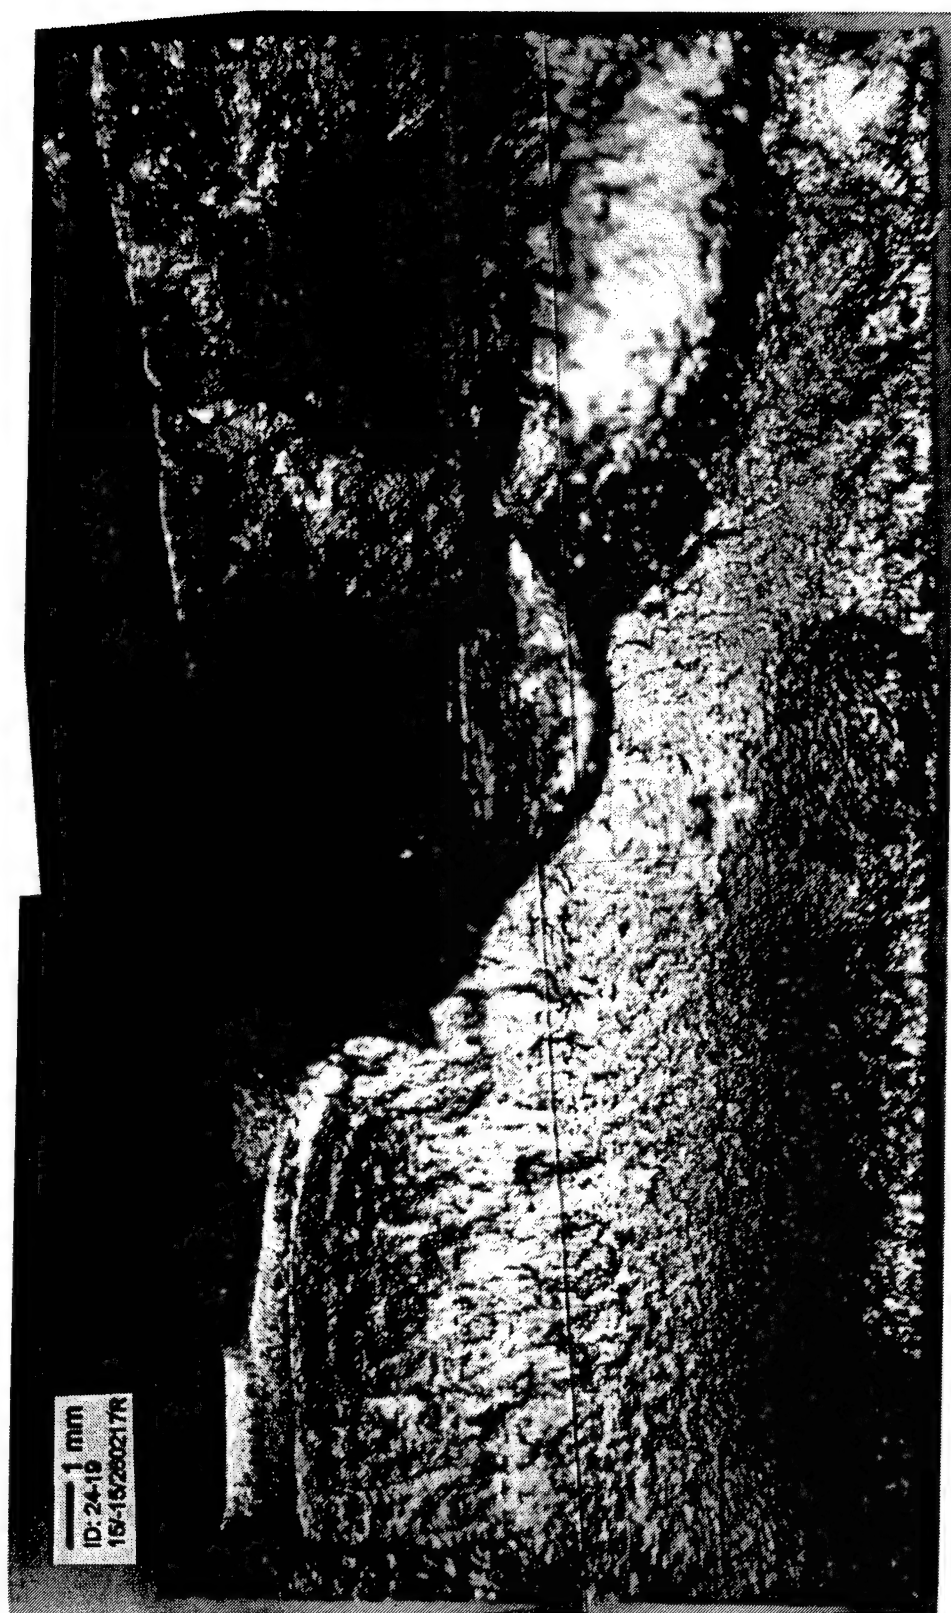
Fatigue fracture surface of the HSLA-80 but weld sample subjected to random loading:
